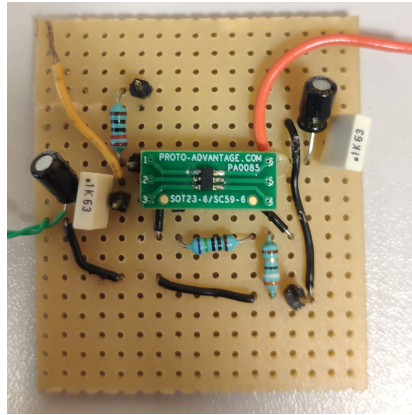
OPA847 prototype on a welding breadboard
